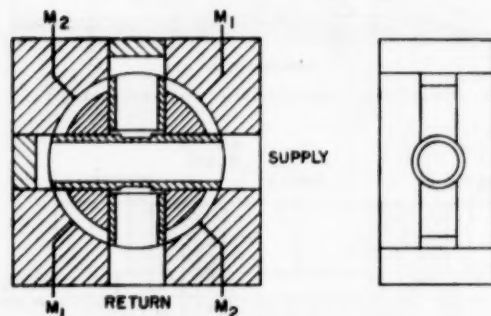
ROTARY-CYLINDER VALVE USING HOLE-AND-PLUG-TYPE METERING ORIFICE
